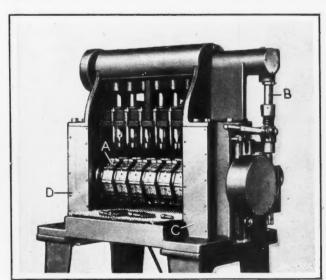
Six-spindle Counterboring Machine equipped with a Turret that has Rotary and Vertical Movements
